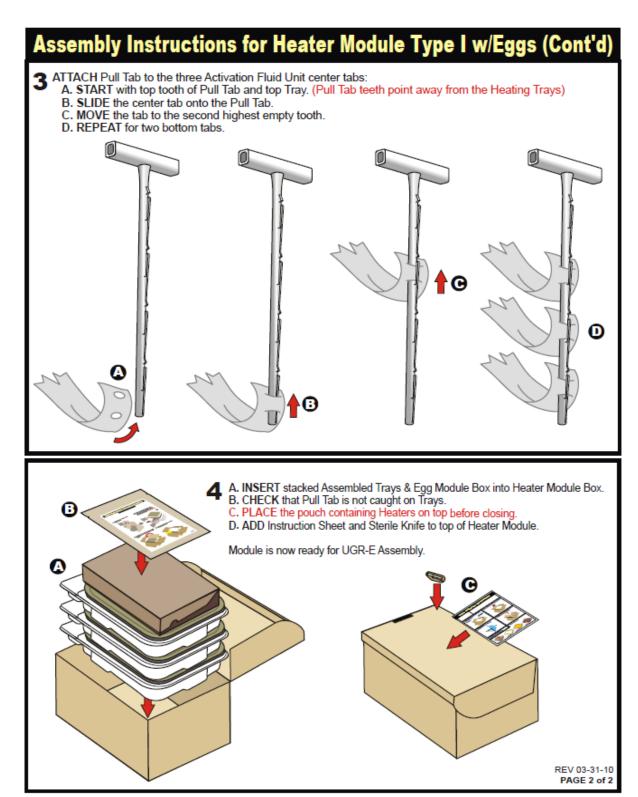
Assembly Instructions for Type I Heater Module with Eggs -Continued
